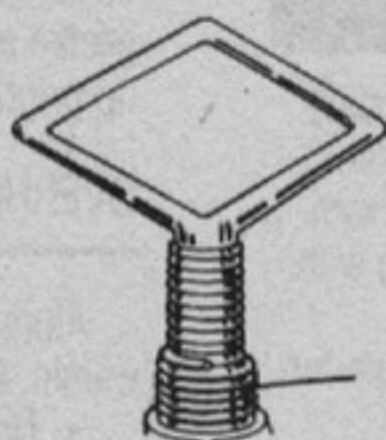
Screw the threaded insert onto the installation tool until the tang engages the slot. Screw the insert into the tapped hole until it is  $\frac{1}{4}$ – $\frac{1}{2}$  turn below the top surface. After installation break off the tang with a hammer and punch
